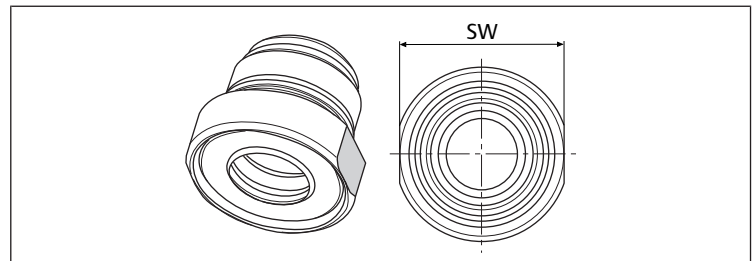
Ø 32 – 40 mm | Modular scraper system with wrench flats
